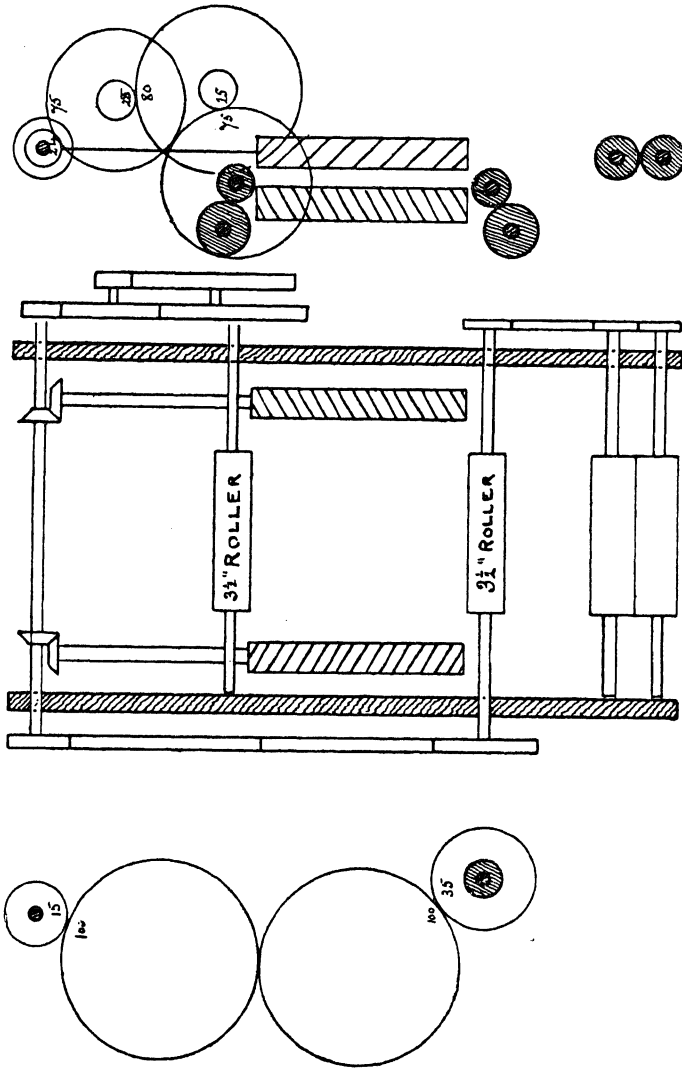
PLAN AND SIDE ELEVATIONS OF SECOND PREPARING-BOX WITH 3-STUD GEAR TO BACK ROLLERS.
